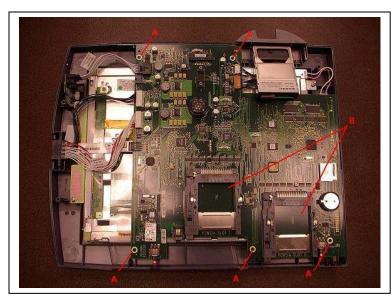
Diebold TSx motherboard A = Phillips head screw holes B = PCMCIA card slots
